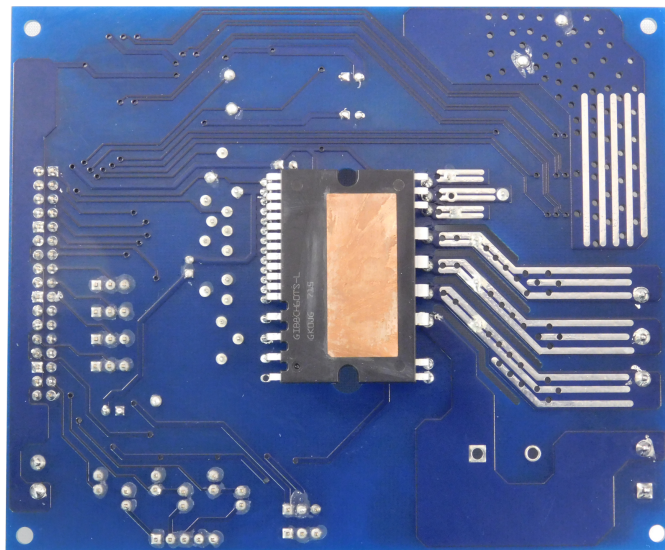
SLLIMM 2nd series motor control internal demo board (top view)
